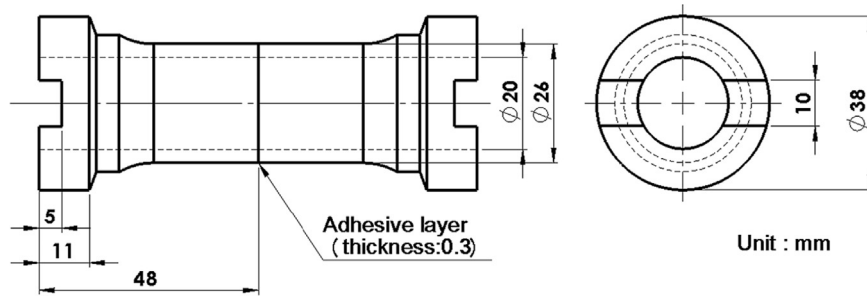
Configuration and dimensions of cylindrical butt-joint specimen.
